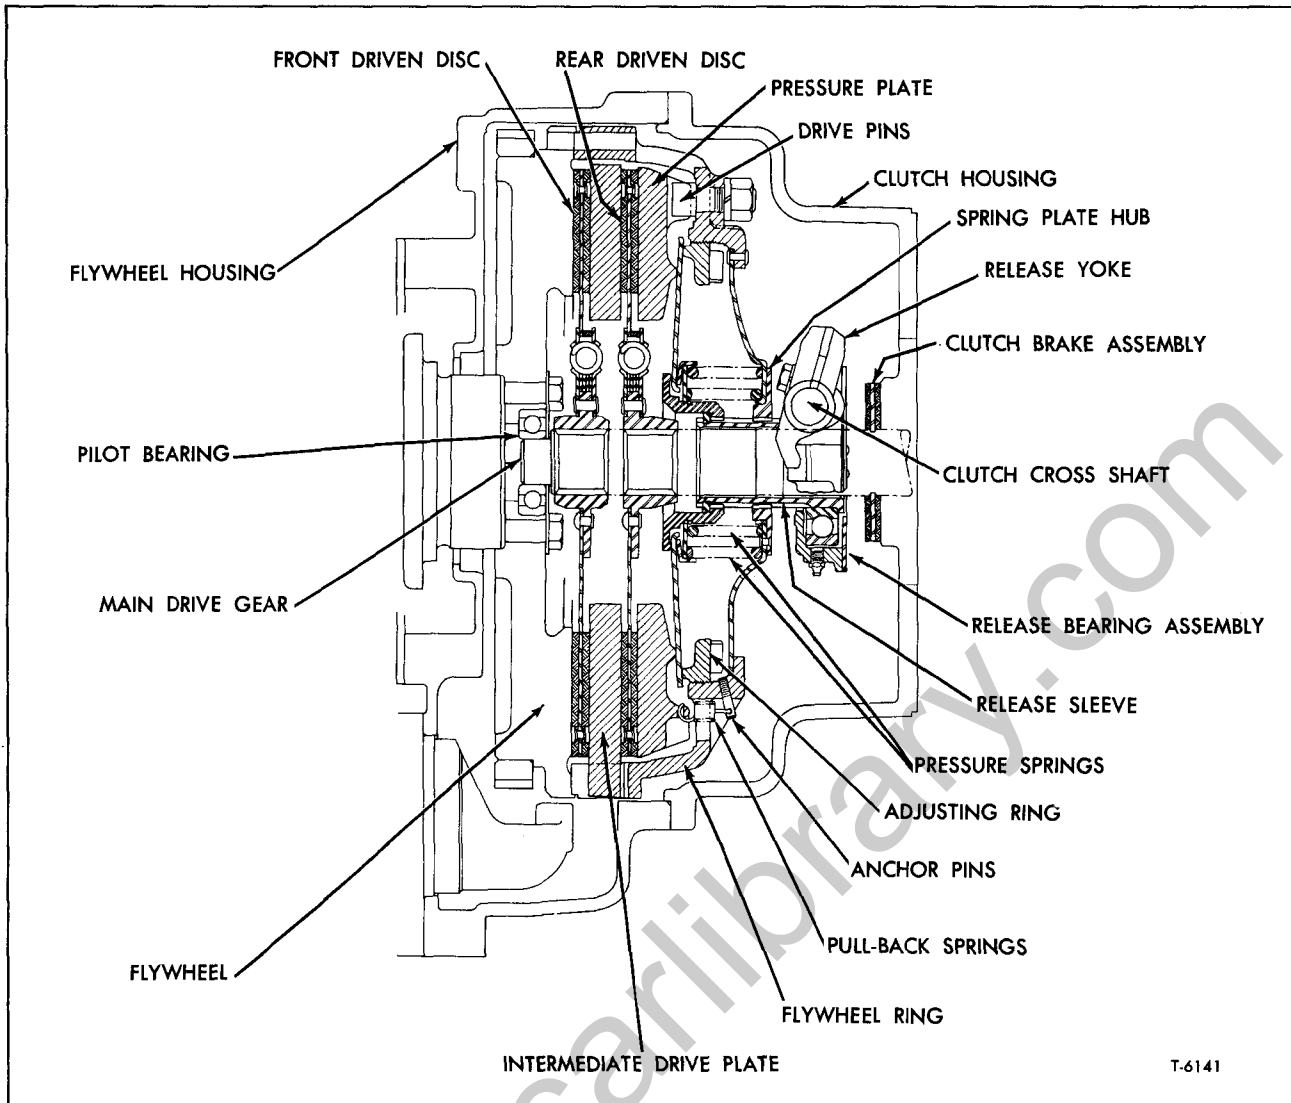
Spicer 15 1/2-Inch Dual Disc Clutch
